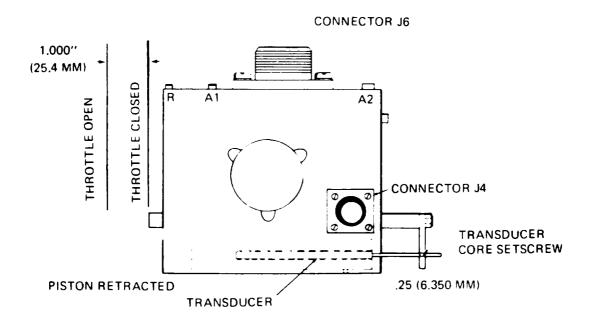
Hydraulic Actuator Unit Test (Electro-Hydraulic Governor Equipped Precise Sets Only)
